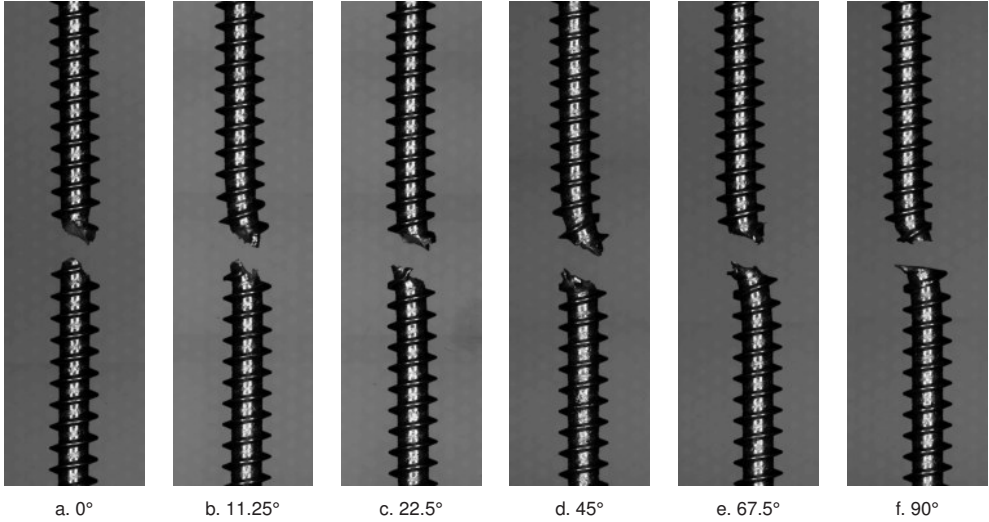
Fracture surfaces for fully threaded screws $d = 6$ mm.
